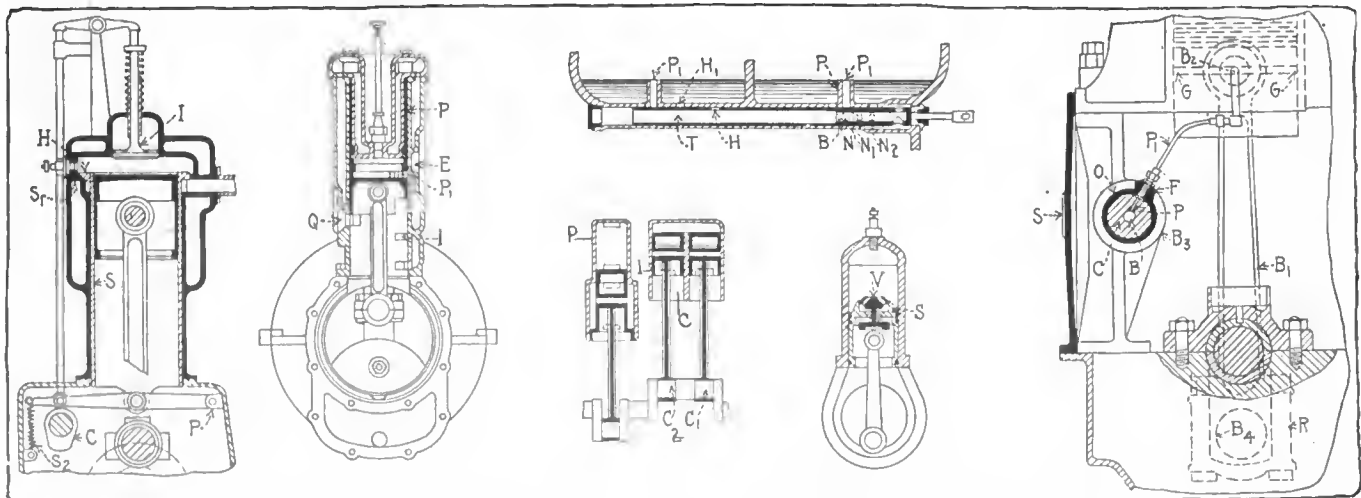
Renault sleeve-valve motor. Fig. 3—Johnson two-cycle sleeve motor. Fig. 4—Peugeot lubricating system. Fig. 5—Ablon twin-cylinder engine. Fig. 6—Behrend piston-carried valve scheme. Fig. 7—Russett lubrication
